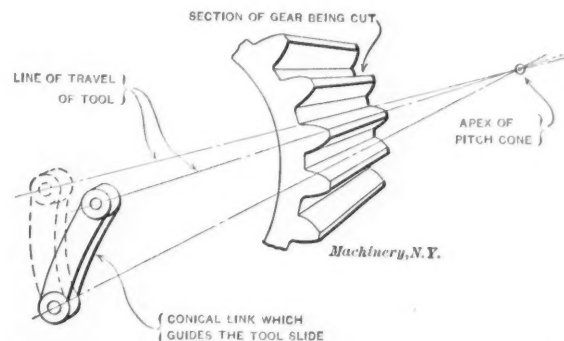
Diagram illustrating the Odontographic Principle for Forming the Teeth of Bevel Gears.
